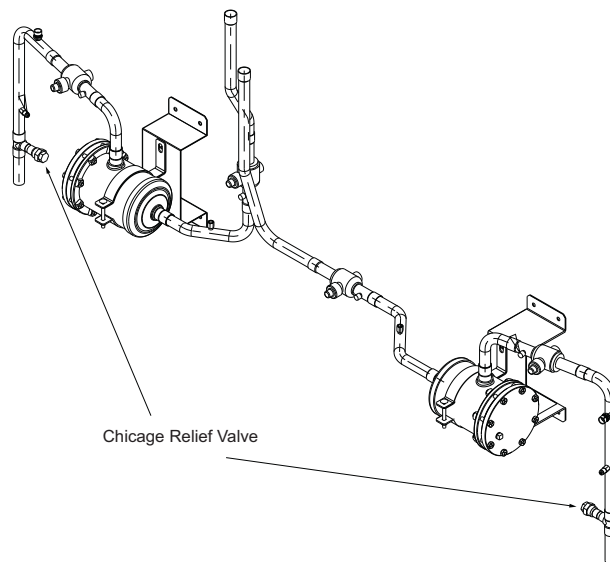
Chicago Relief Valve Locations (Dual Circuit Shown)
